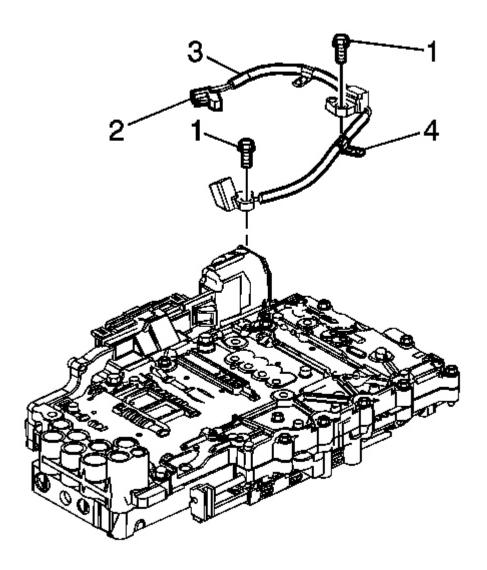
Valve Body Assembly Courtesy of GENERAL MOTORS CORP.
